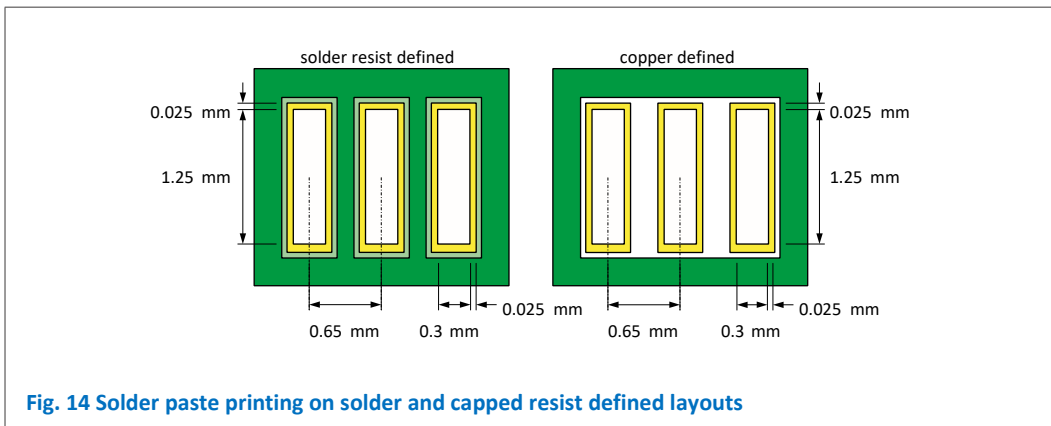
Solder paste printing on solder and capped resist defined layouts
